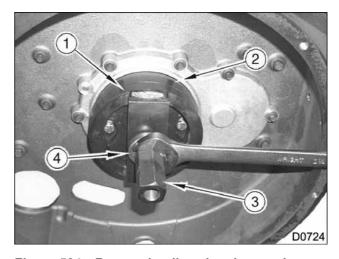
Rear main oil seal and wear sleeve combination on crankshaft
